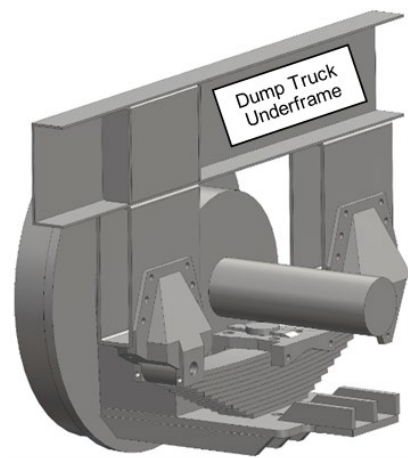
Sectioned View of Suspension Attachment Between the Railway Wheelset and Dump Truck Underframe
